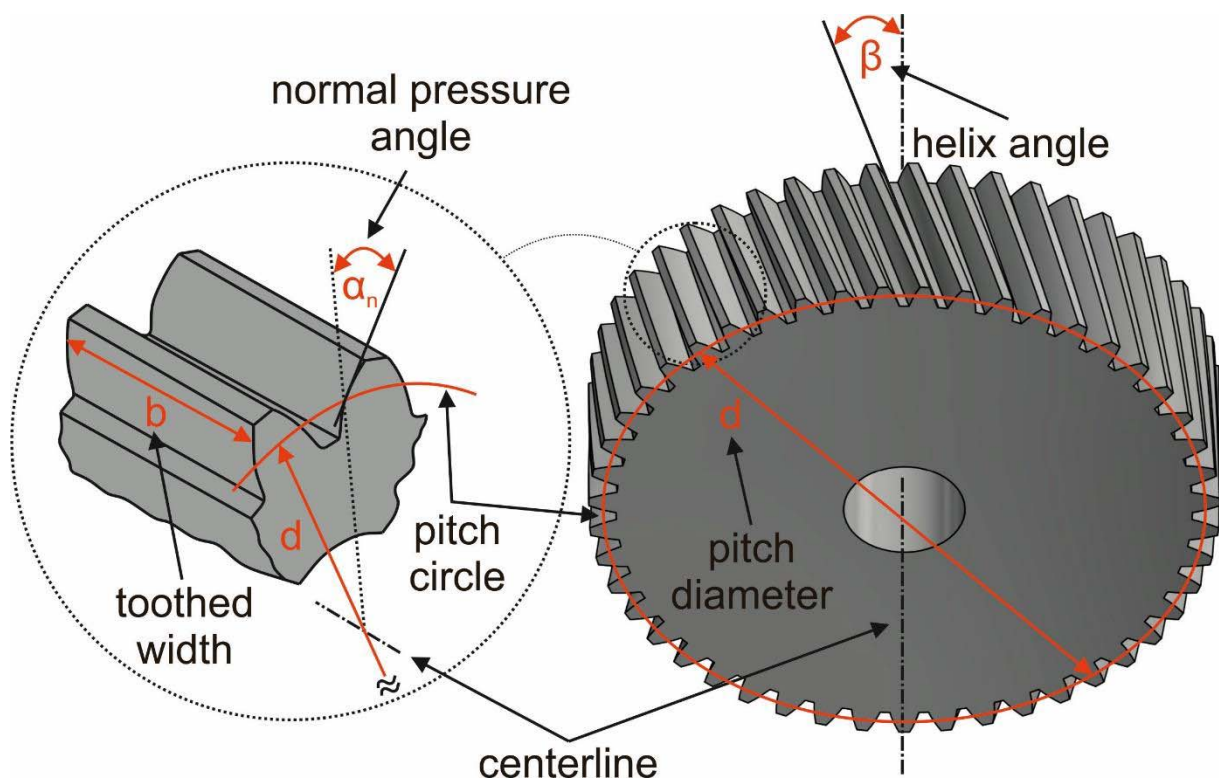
Geometry of the used gears for discontinuous profile grinding.
